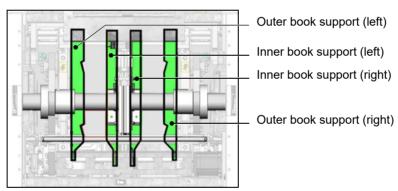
Top view of Side-Trimmer - Inner and out book supports (centre book support removed)
